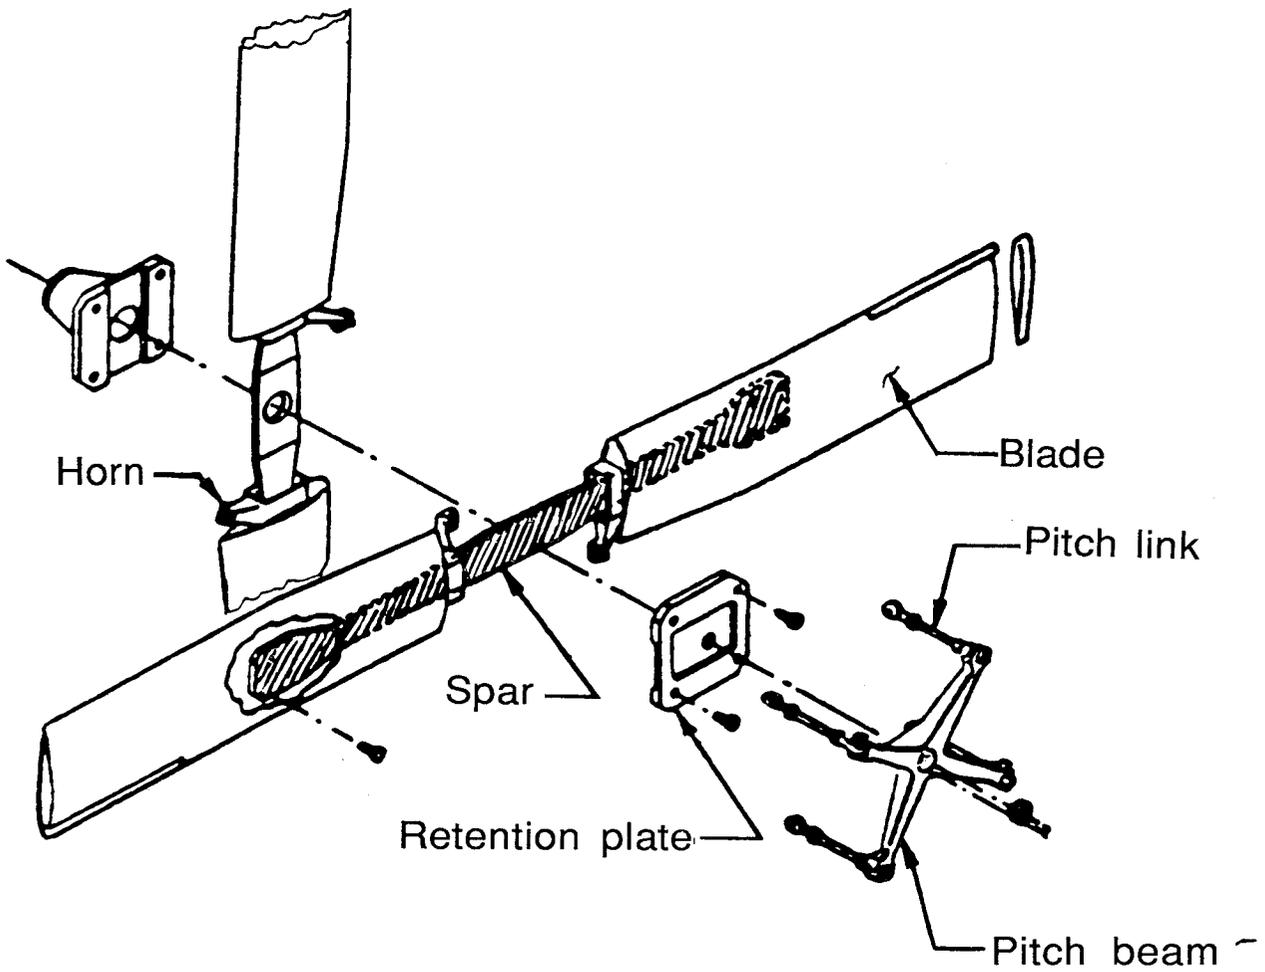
SCHEMATIC REPRESENTATION OF THE S-76 TAIL ROTOR PADDLE ASSEMBLY
